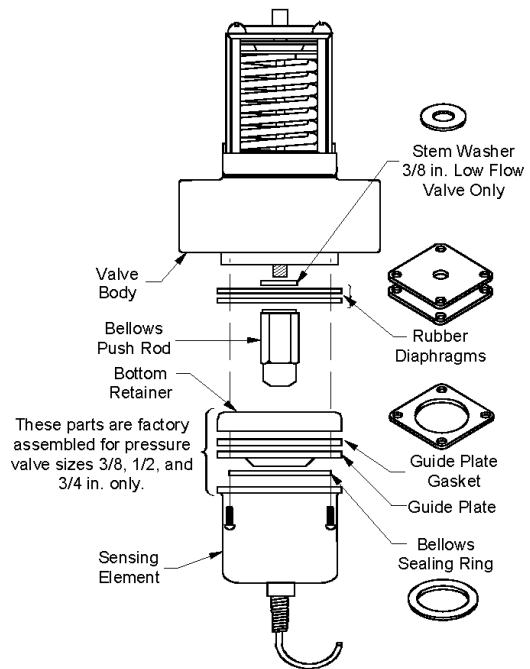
Guide Plate Gasket and Bellows Sealing Ring Identification
